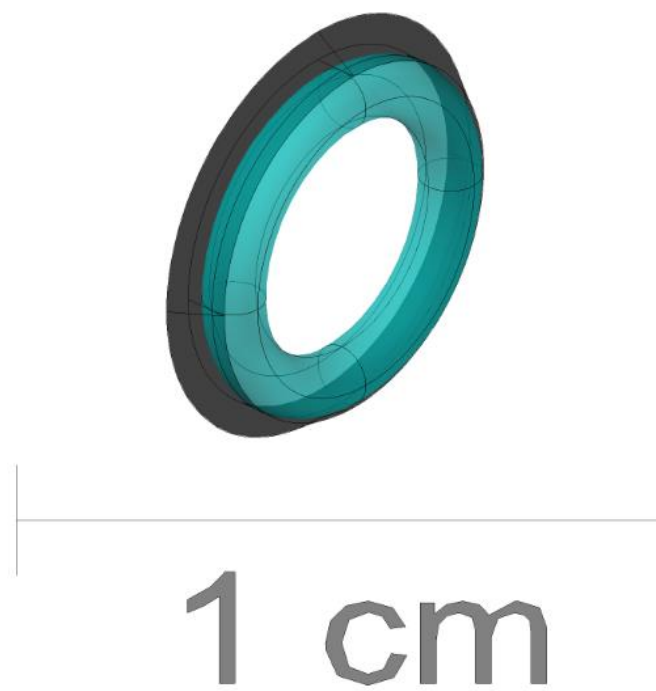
O-ring holder with O-ring (in cyan). It is used to keep the O-ring in place during measurements.
